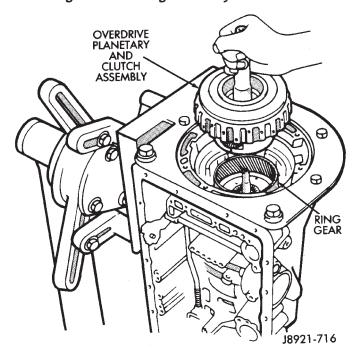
Installing Overdrive Planetary And Clutch Assembly
